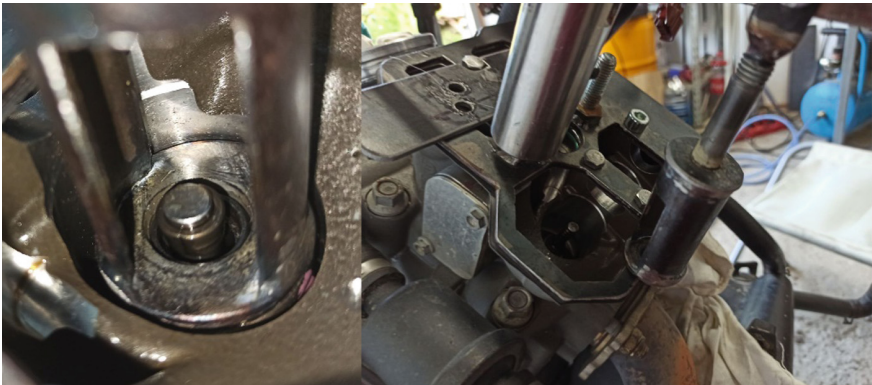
Removal of valve collet halves (left), removed springs and spring retainer plate (right).
